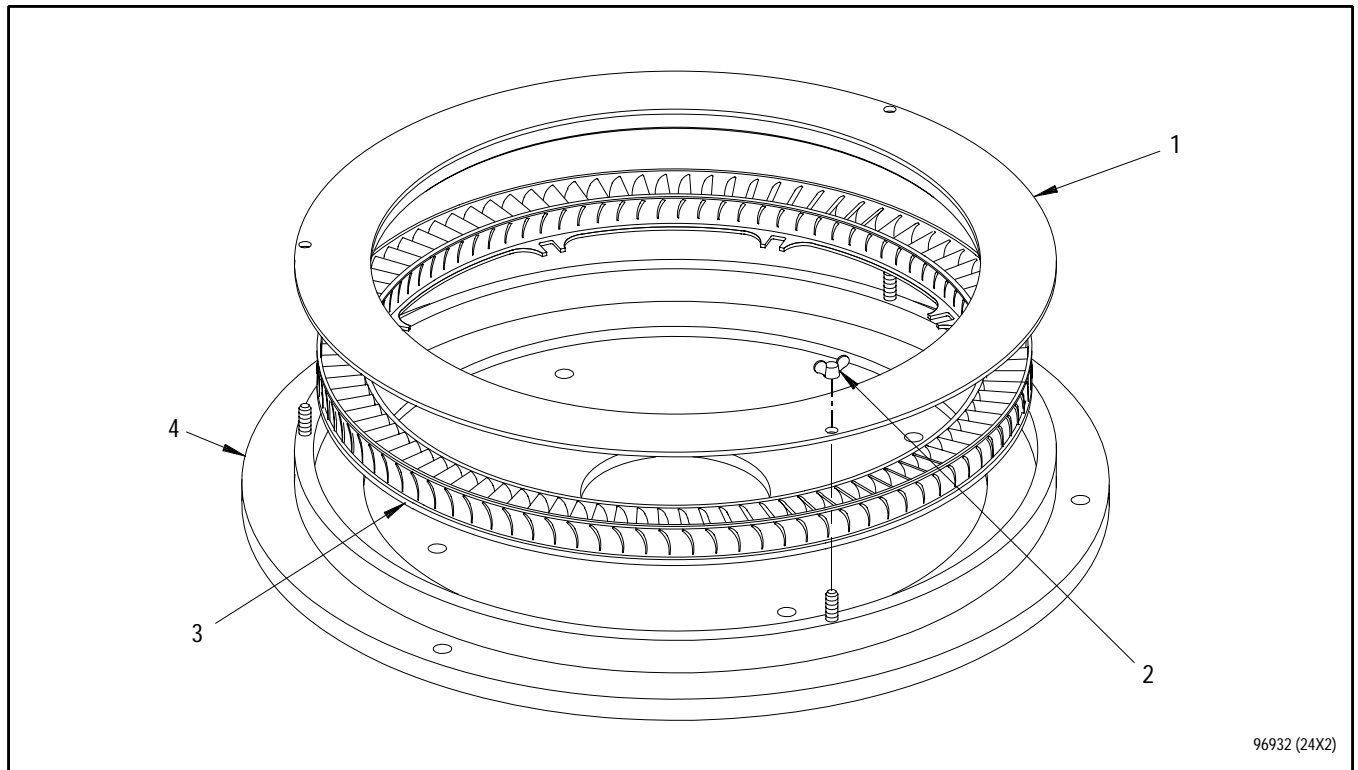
Compressor Exit Stator - Mounting Lug Slot Repair (Sheet 2 of 2)
